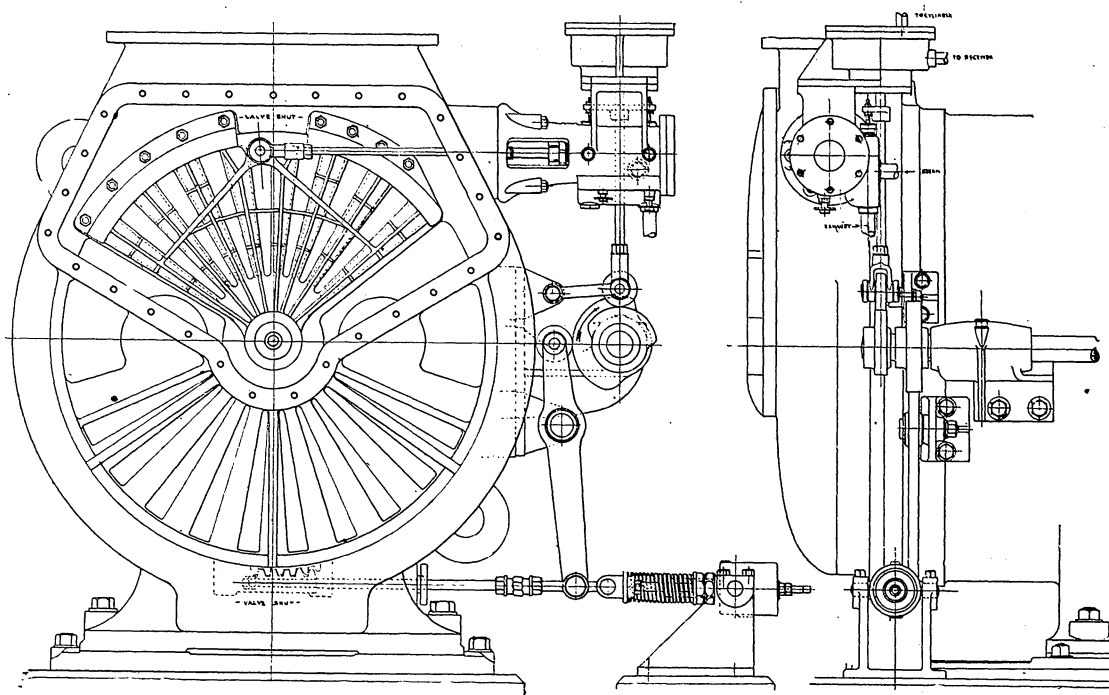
Automatic Air Valve, Bessemer Blowing Engine, Cambria Iron Company.
